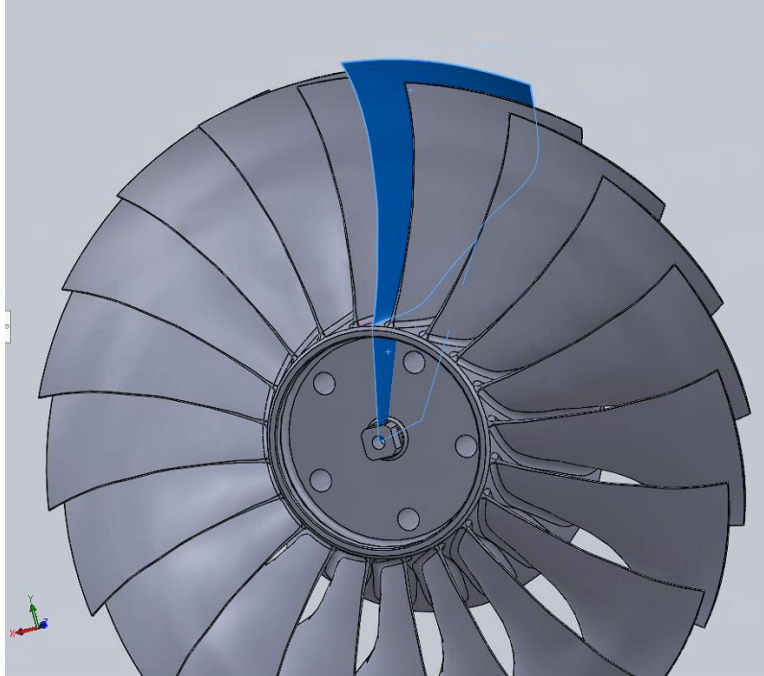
Surfaces extended above and filled below the blade-conforming surface.
